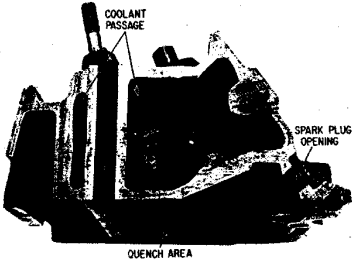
Section view of a wedge-shaped combustion chamber.
